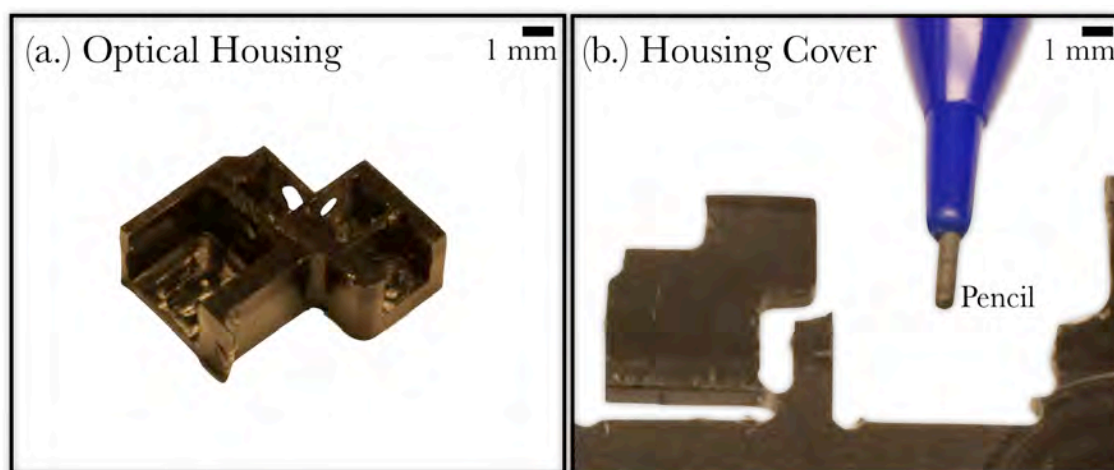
Fabricated optical housing and housing cover. In (b.) the housing cover is pictured near a pencil, and shown attached to the plastic sheet after milling. This connection is severed when the cover piece is needed.
